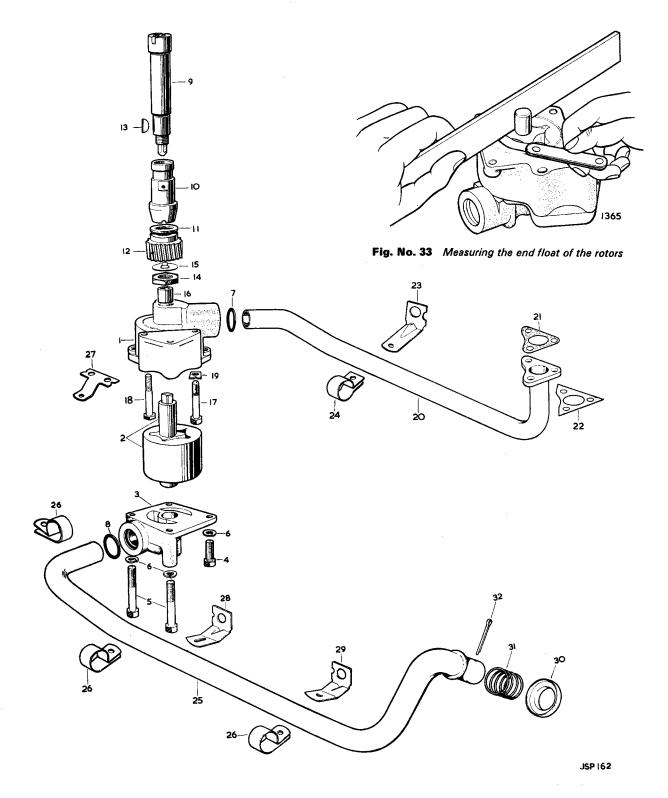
Exploded view of the oil pump (1) Pump body (2) Rotor assembly (3) Cover (4) Setscrew (5) Setscrew (6) Spring washer (7) "O" ring (8) "O" ring (9) Drive shaft (10) Bush (11) Washer (12) Helical gear (13) Key (14) Nut (15) Special
